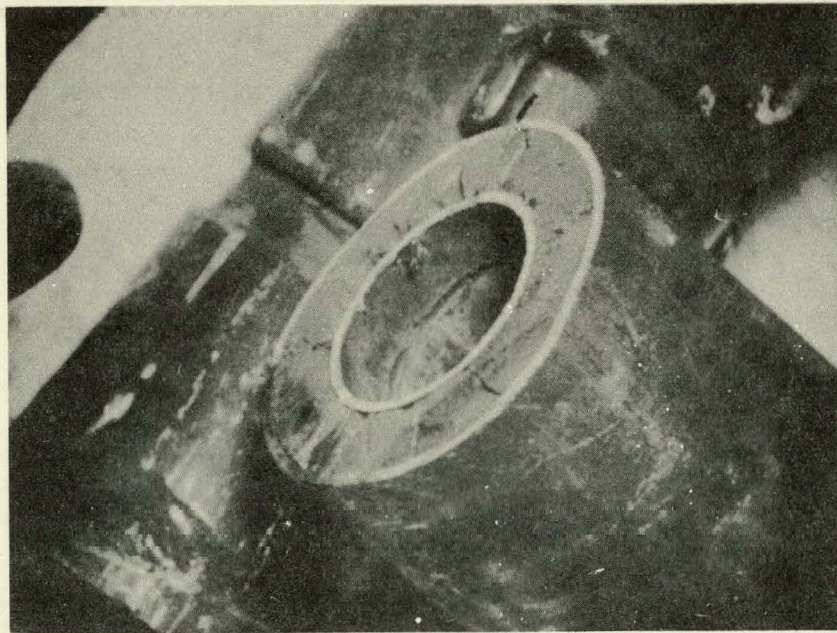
CIRCUMFERENTIAL CRACK IN SH-4C, LOCATED AT ABOUT 3 INCHES FROM THE STEAM EXIT, INNER PASS.
